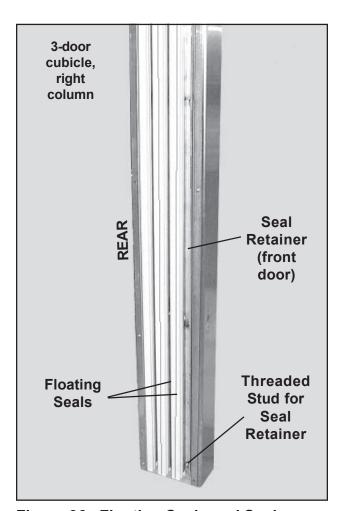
Floating Seals and Seal Retainer for Front Door in Place
